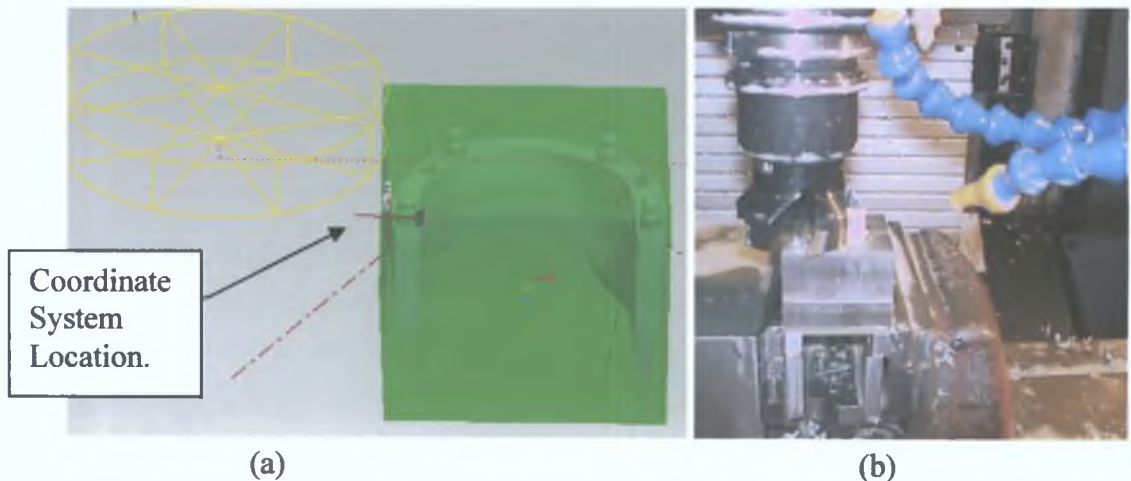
Face Mill Sequence 1. (a) ProEngineer Tool Path. (b) Machined Work Piece.
